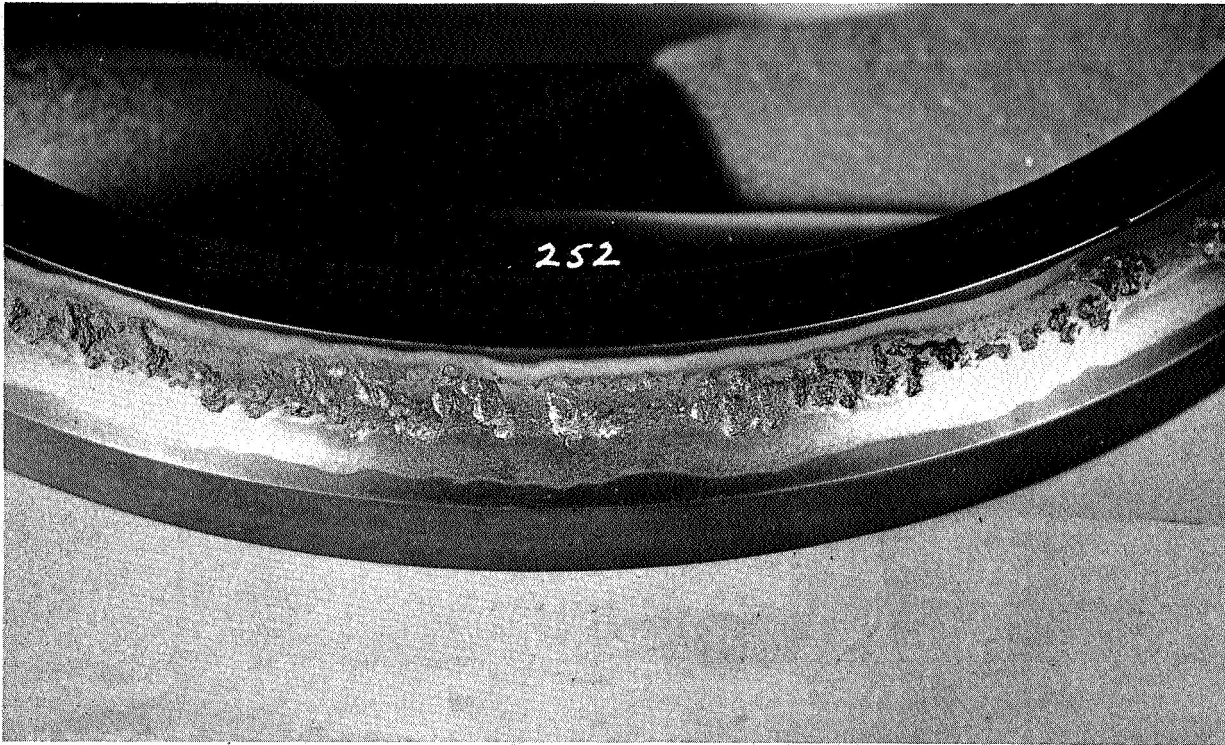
INNER RING FATIGUE FAILURE, S/N 252
